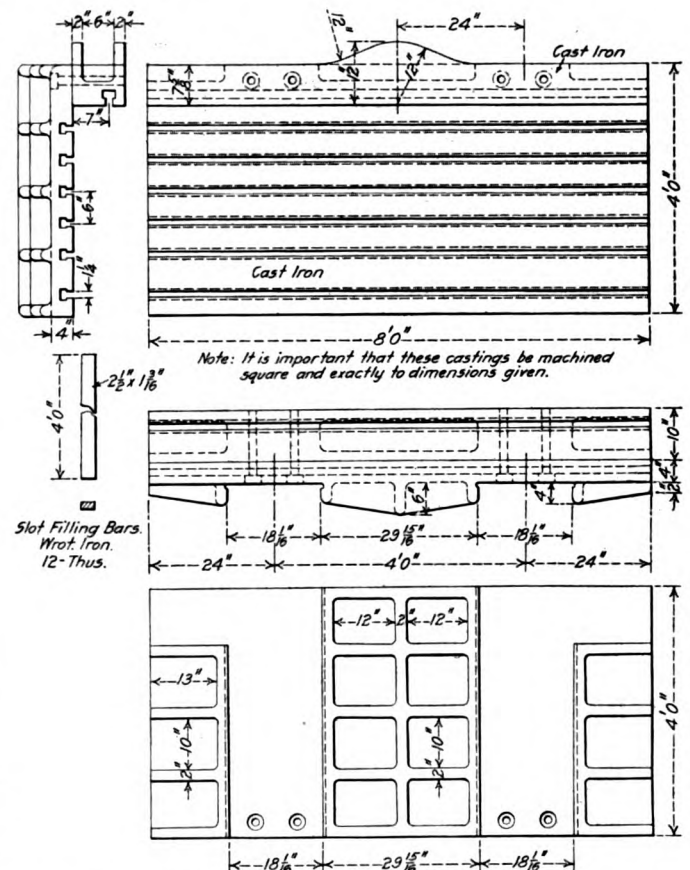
Surface Plate for Holding Small Dies on a Bulldozer.
